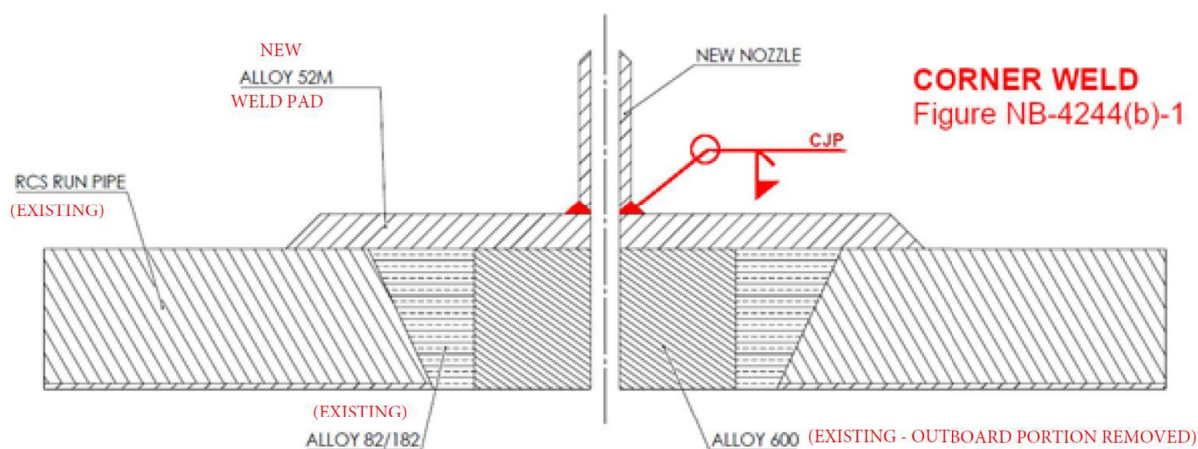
Sketch of Example Repaired Nozzle Configuration with Alternative Full Penetration Corner Weld
